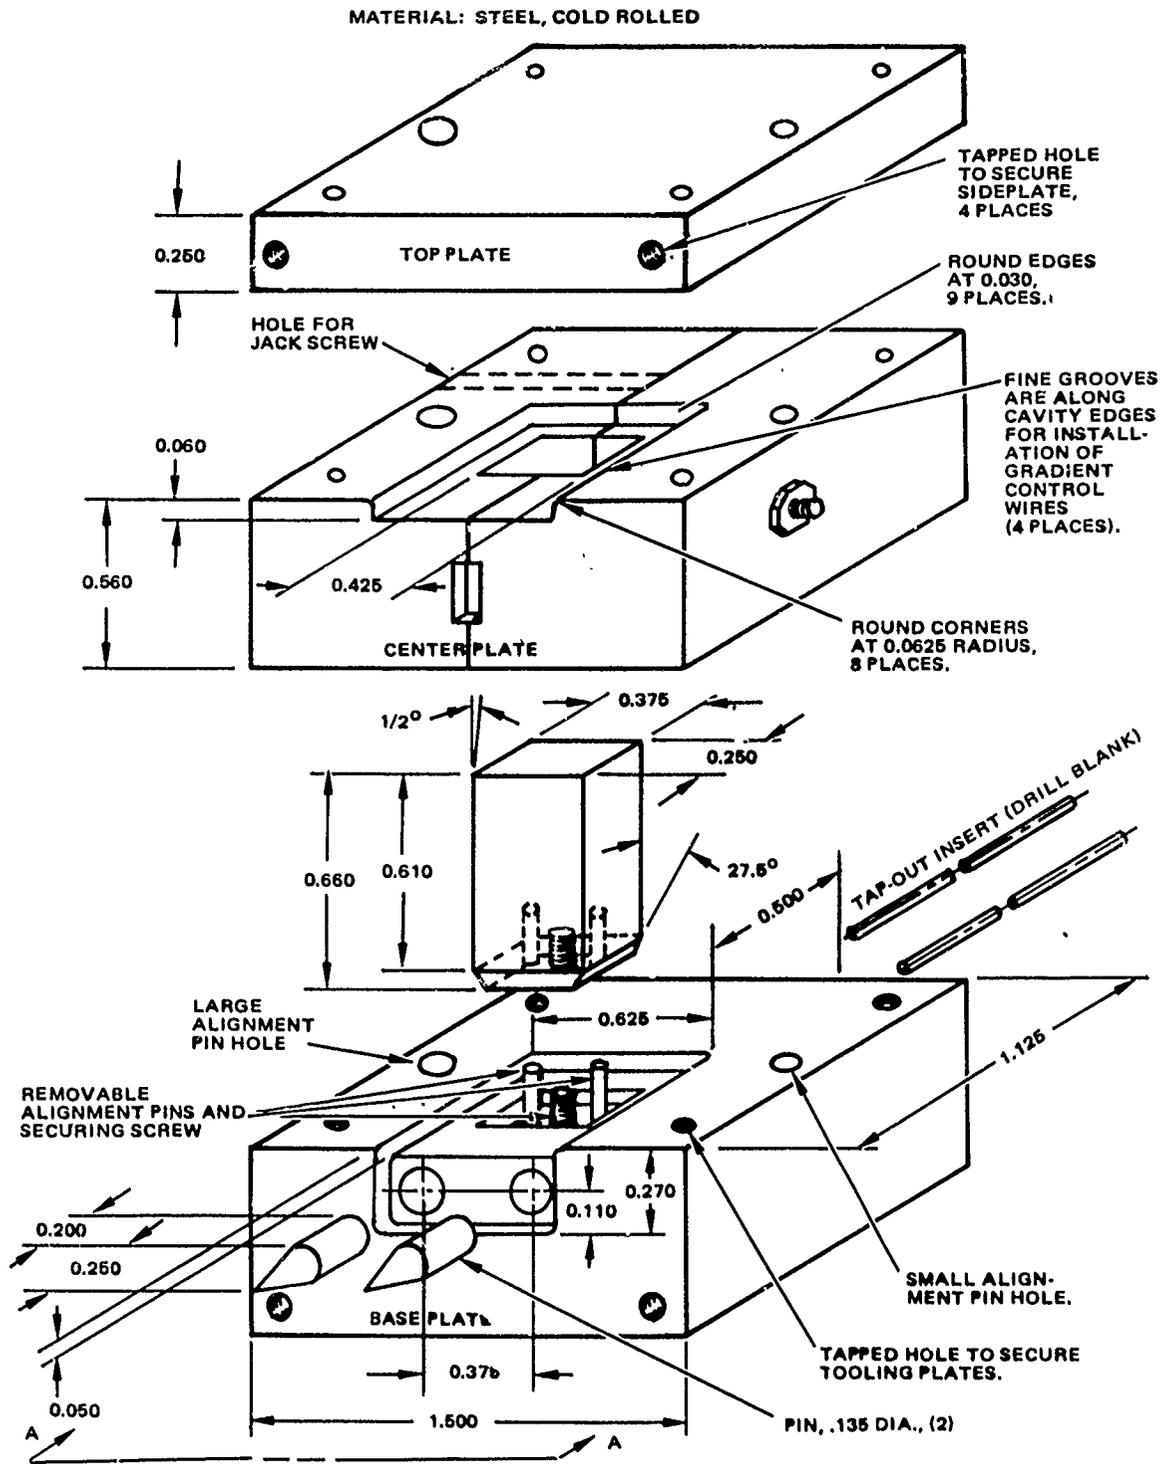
Dimensioned sketch of fabricated vacuum/pressure casting mold (sheet 2 of 2).
